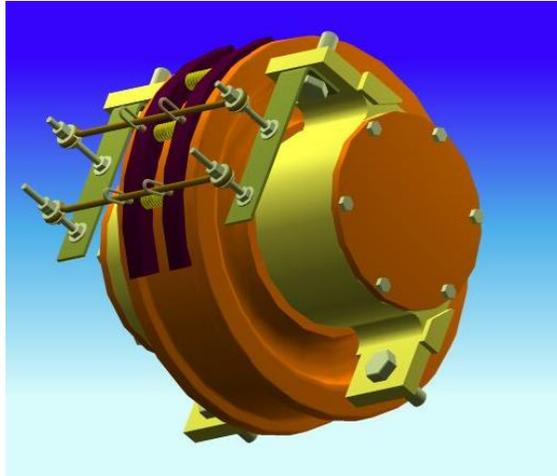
DRAWING OF A MICROPOLY CRANE WHEEL FLANGE LUBRICATING SYSTEM
